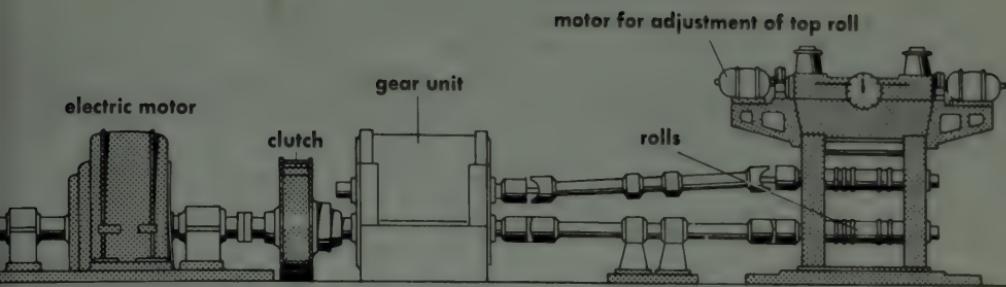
ROLLING MILL WITH DRIVE MACHINERY
